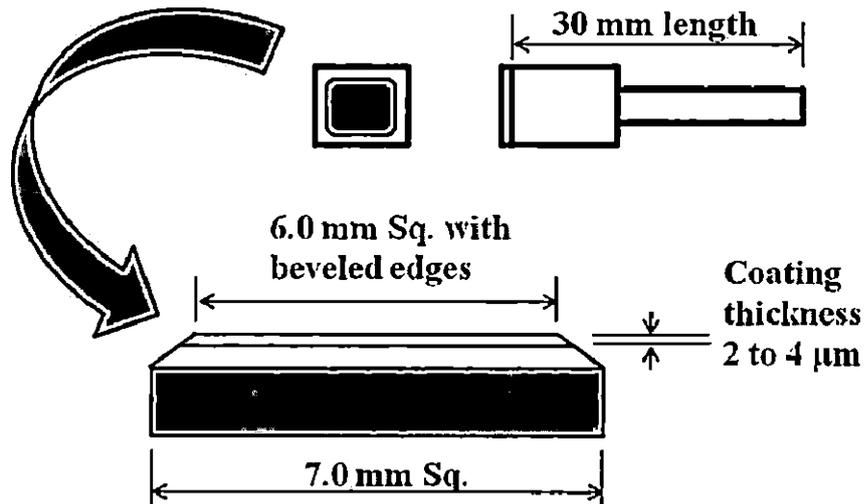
Physical shape and dimensions of coated pin prepared for pin on disc test.
